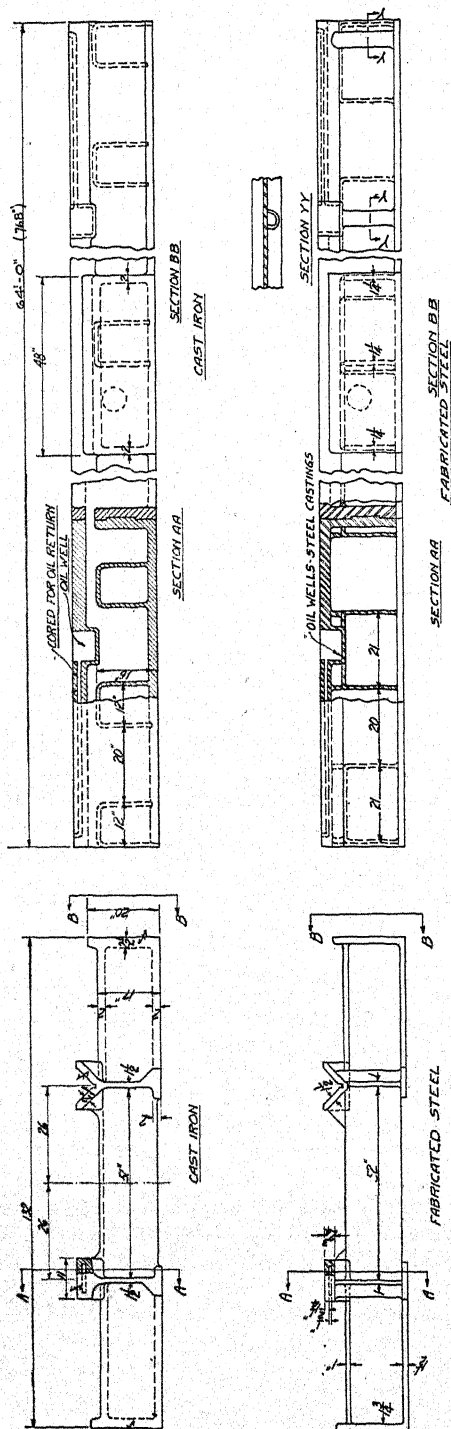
Cross-sections of bed. Top right—side view; top left—front view, both for cast iron. Bottom, same views for welded steel.
